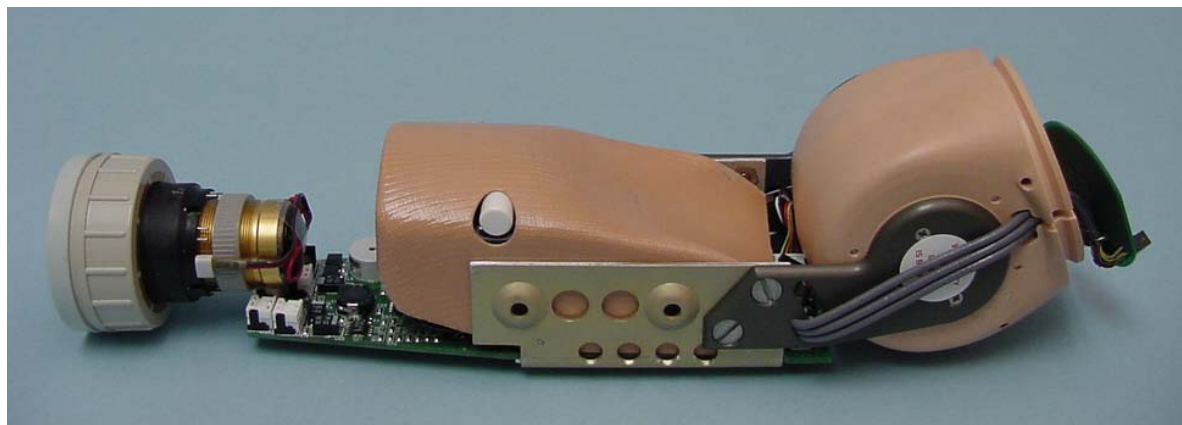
The Rotator can be positioned over the circuit board until the gray plastic ring just touches the connectors. The distal edge is then 9.25" (235mm) from the center of elbow rotation.
